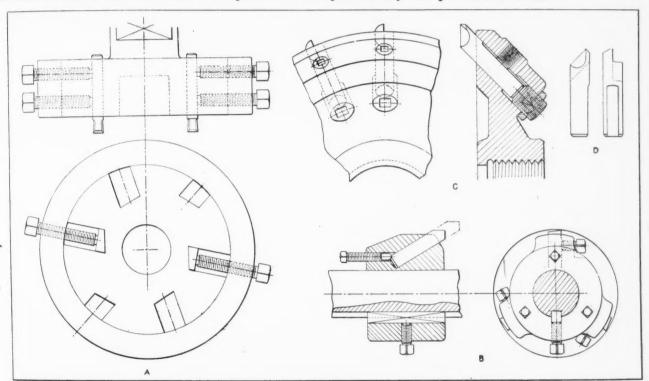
Methods of Holding Cutters in Boring and Grooving Heads
